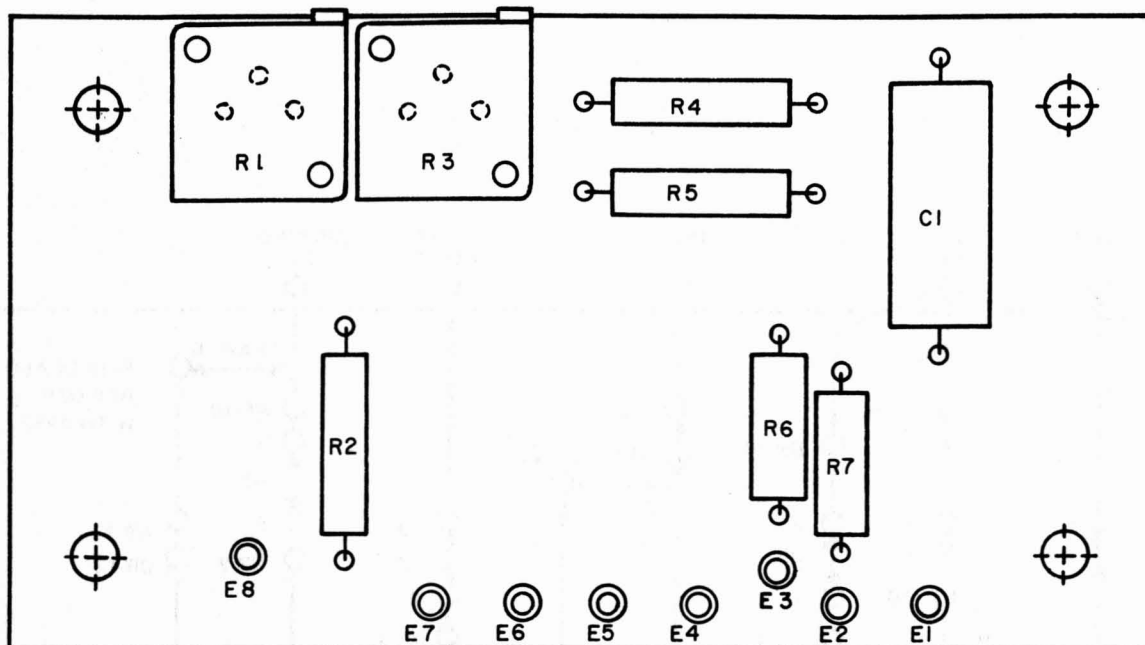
Code Generator Assembly, Test Point Location Diagram (Bottom-Rear View)
